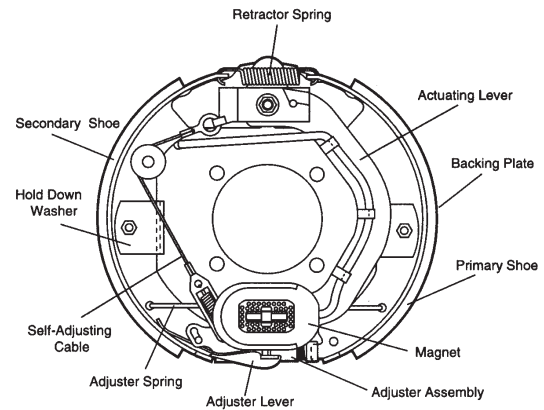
displays the major electric brake components that will require inspection and maintenance. Please inspect these components as required. See Table 13. Electric Brake Troubleshooting.
